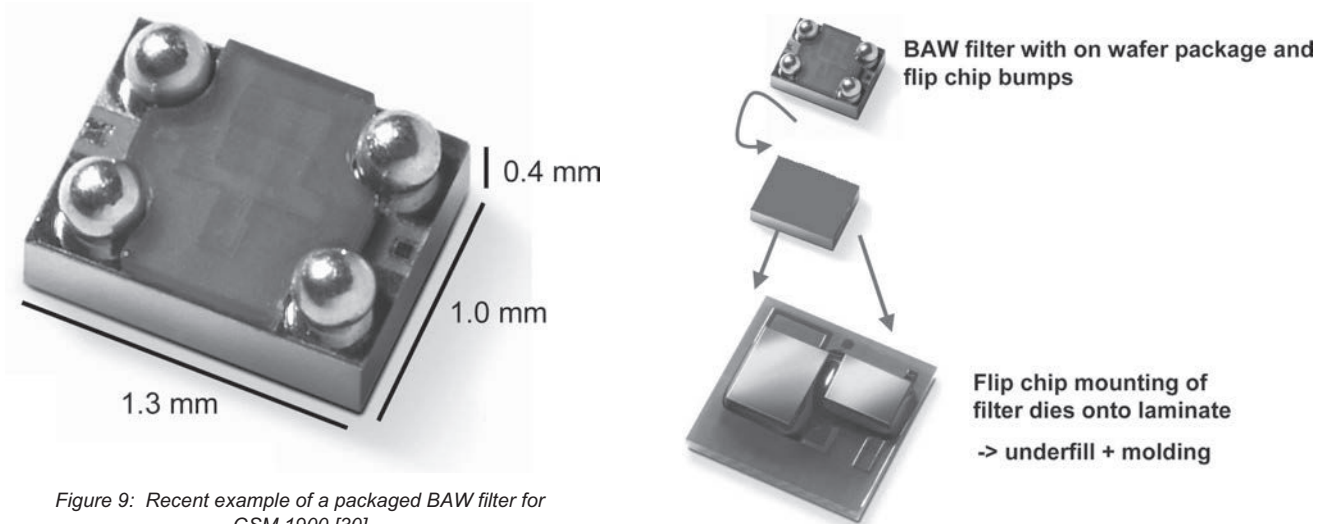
Recent example of a packaged BAW filter for GSM 1900 [30].
